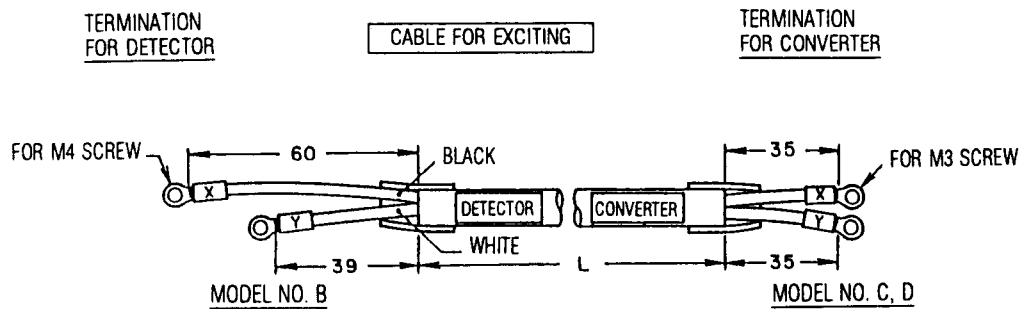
Model KIW Cable End Terminal Processing (For KID)
